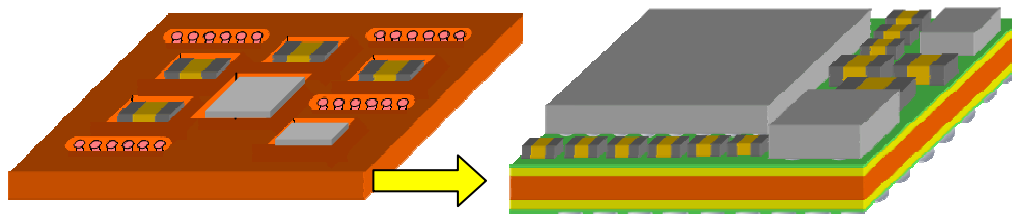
EOMIN® Exterior View (Left: copper core and embedded parts, through holes, Right: module)
